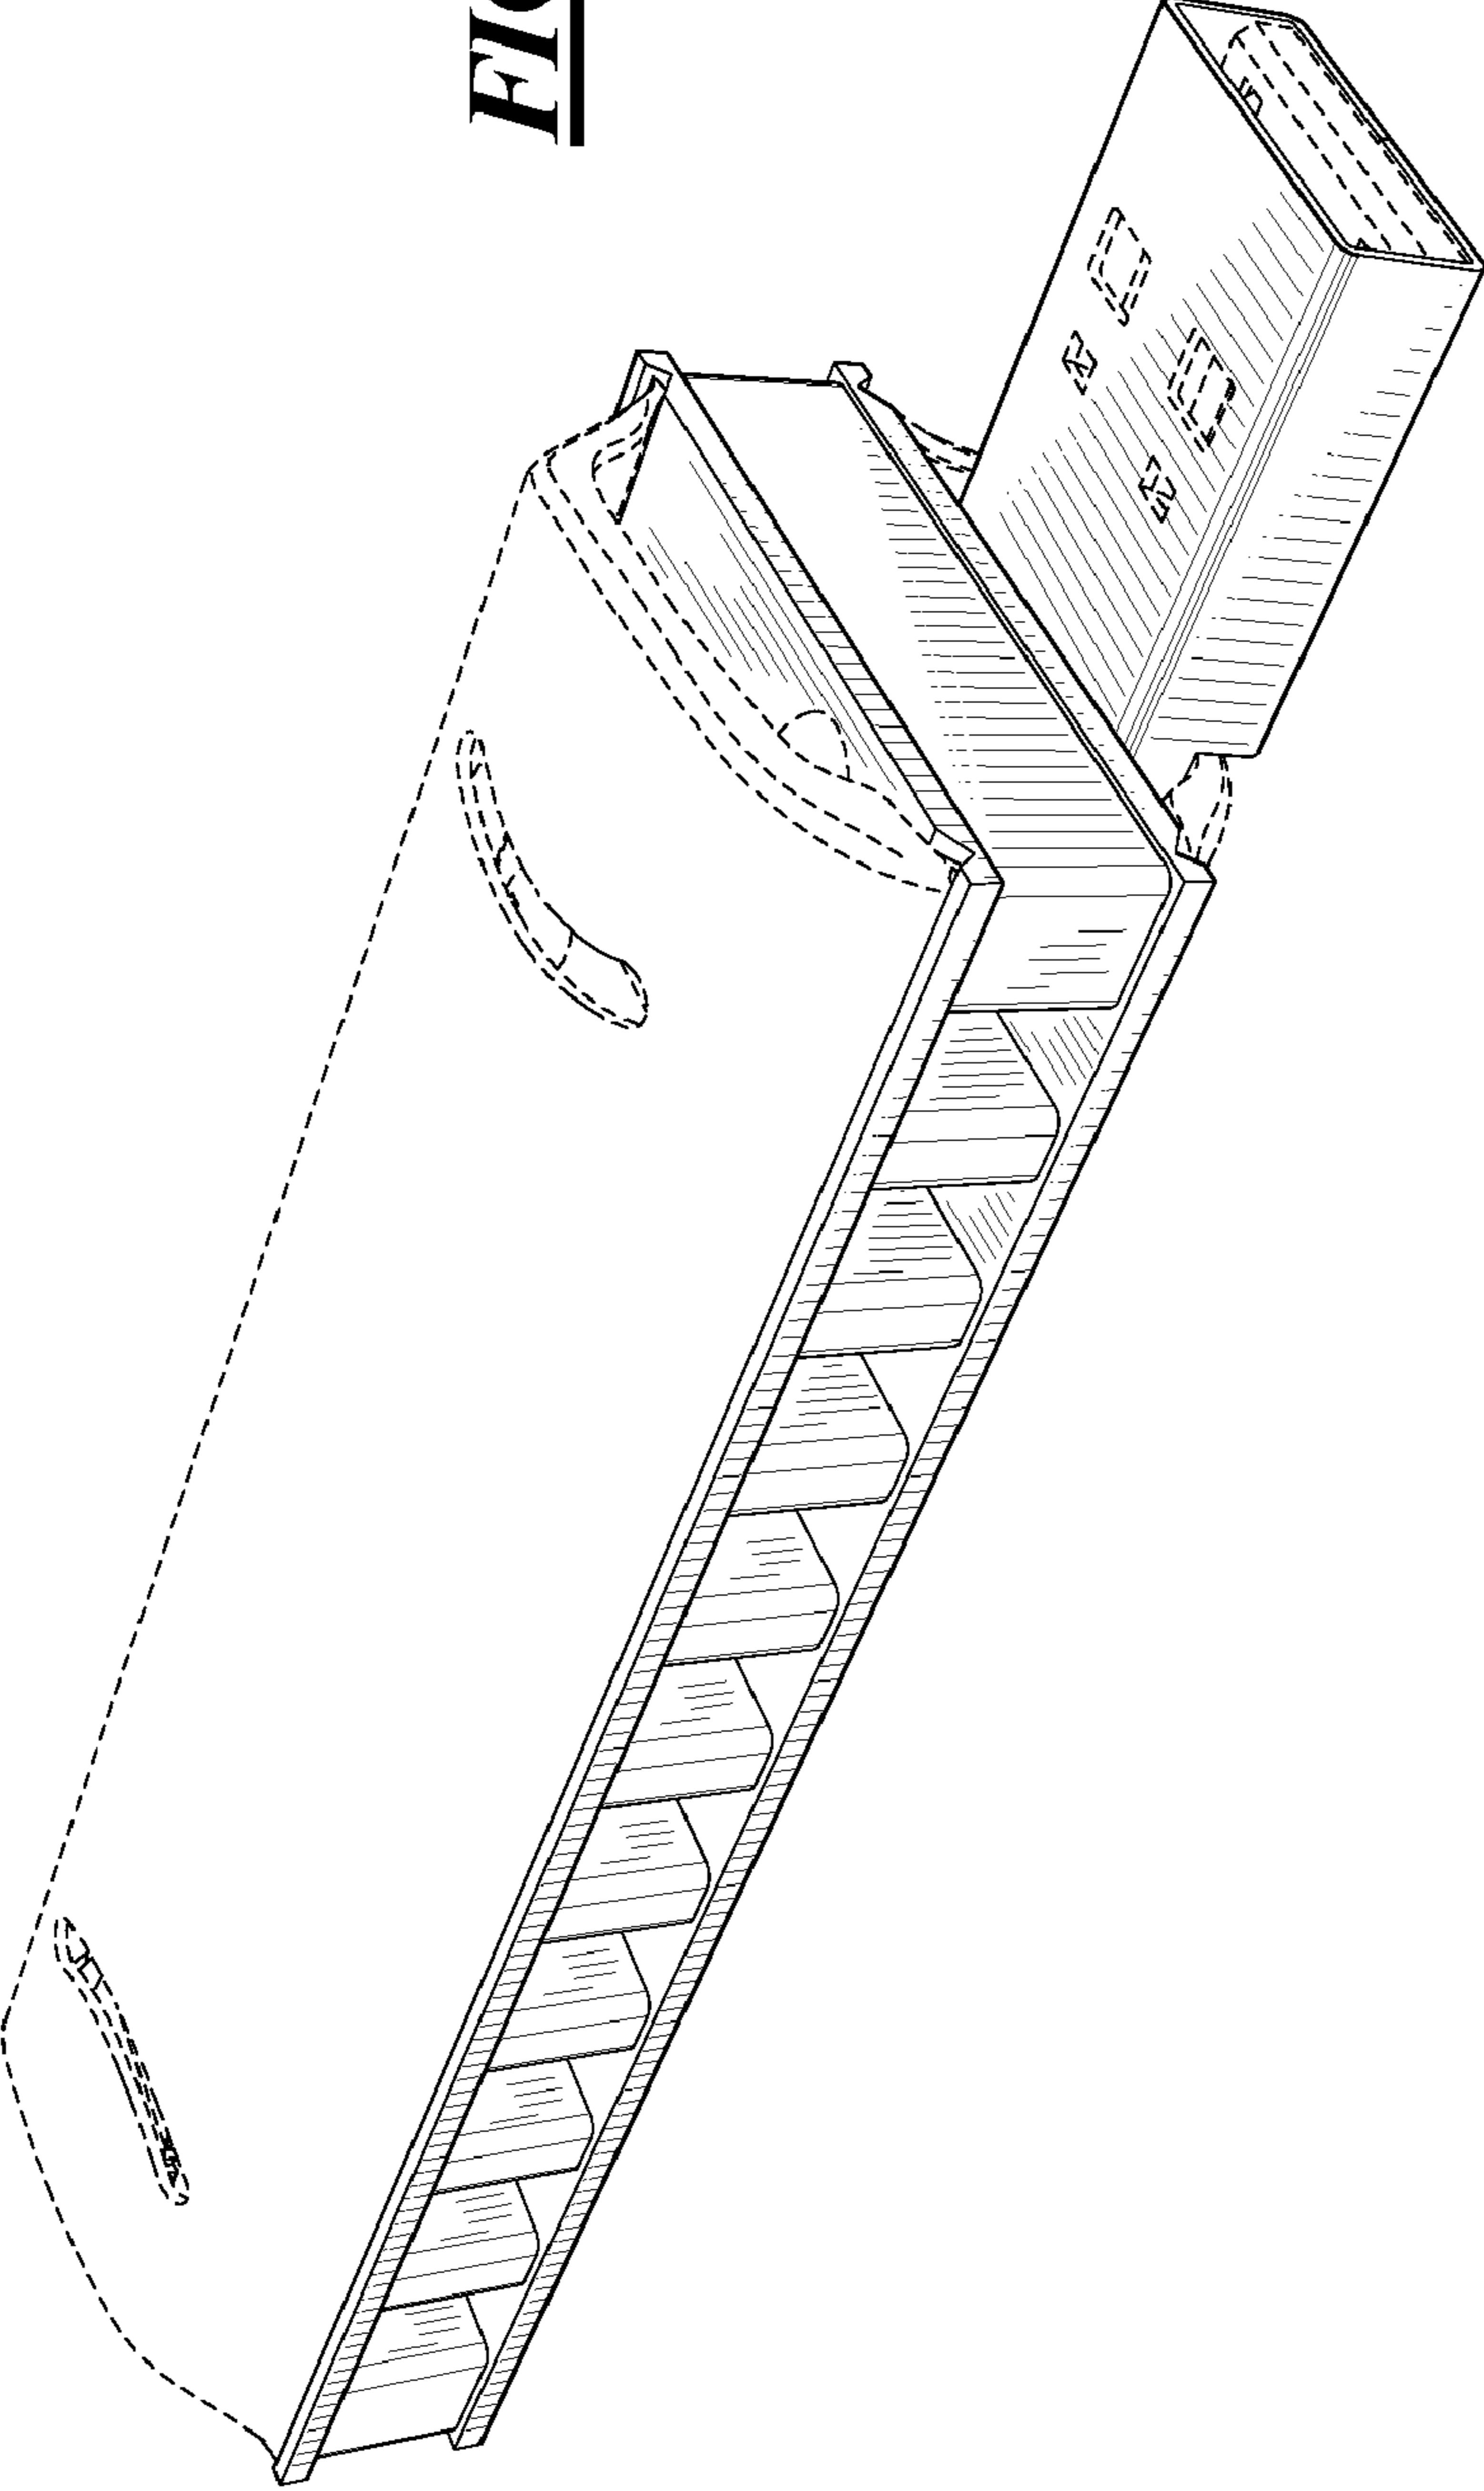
is front, top, and right side exploded view of the USB flash drive shown in FIG. 1, shown with the USB protective cover.
